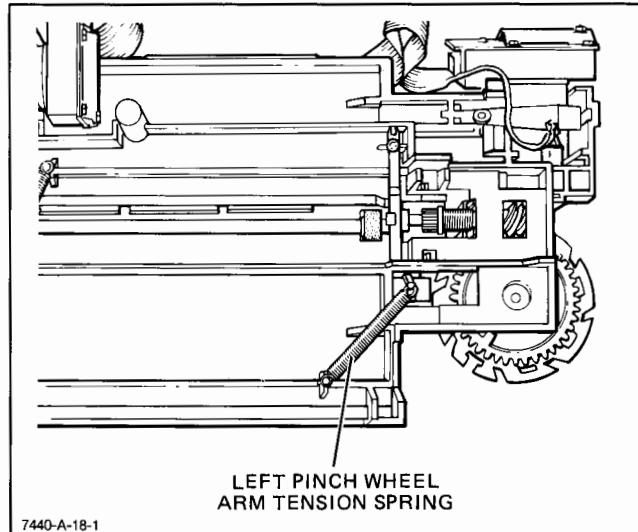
Left Pinch Wheel Arm Removal, Detail B
